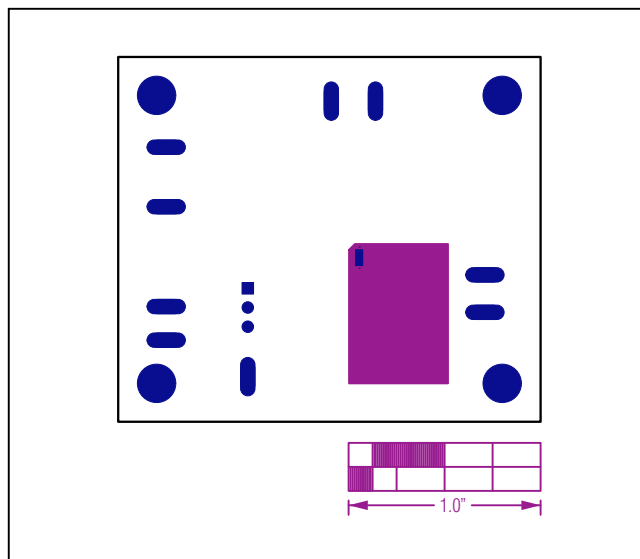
MAX17542G 3.3V Output EV Kit Component Placement Guide—Bottom Solder Mask
